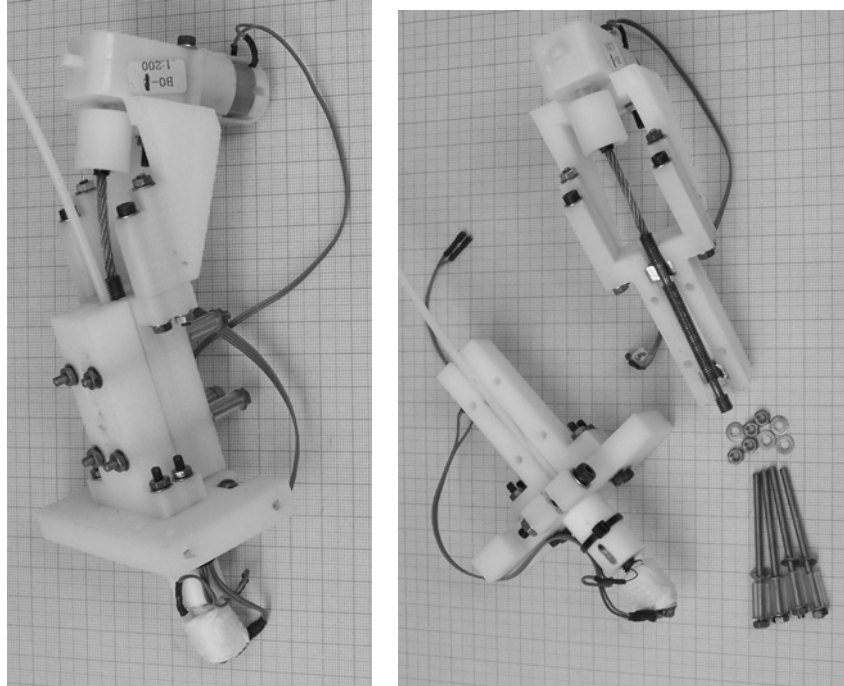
The RepRap polymer extruder assembled (left) and its internals (right). In addition to a US\$4 geared motor it only has one moving part — a threaded drive rod mounted on two half-bearings and rotated by a flexible coupling (a length of steel cable) to allow the motor to be offset. This threaded rod bears against the 3mm diameter polymer supply (which can be seen coming in from the left in both pictures) and drives it down into a melt chamber heated using nichrome wire. The chamber is just another threaded rod that has been drilled down the middle and that ends in a 0.5mm extrusion nozzle. The offsetting is to allow the polymer to run straight down the drive thread. This is not necessary for the polymer used, which is flexible, but will be useful for other materials. The large grid squares are 10 mm.
